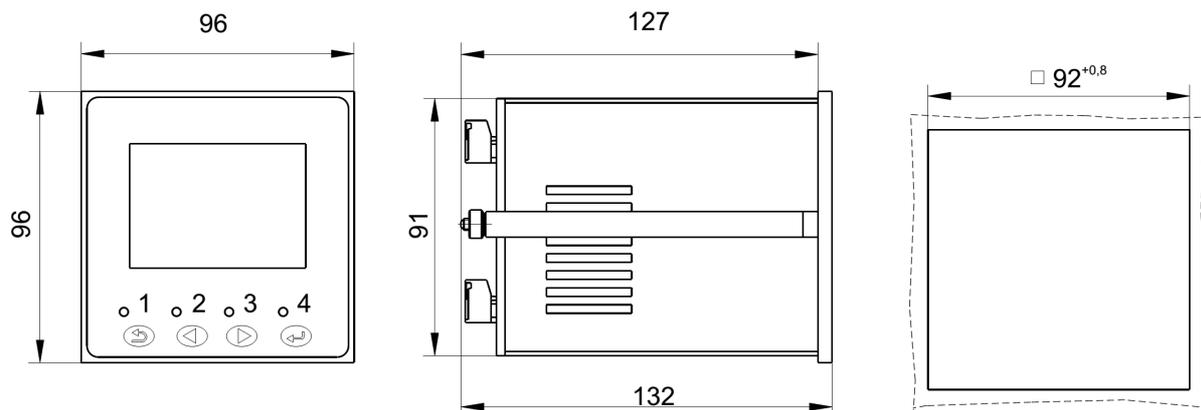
Panel-mounting measuring instrument , aluminum alloy, IP54 on the front panel
